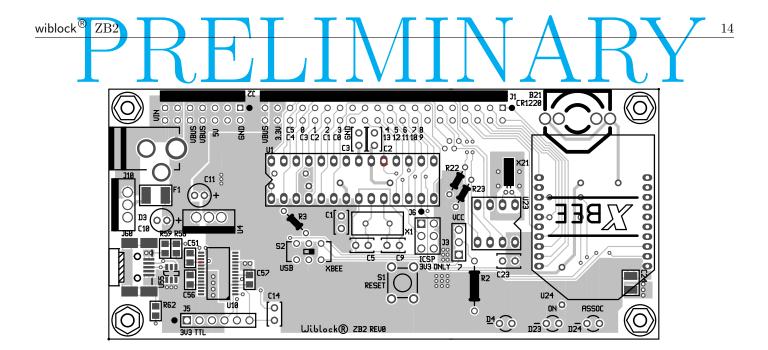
ZB2 Top Side Assembly Drawing (Rev 0)
